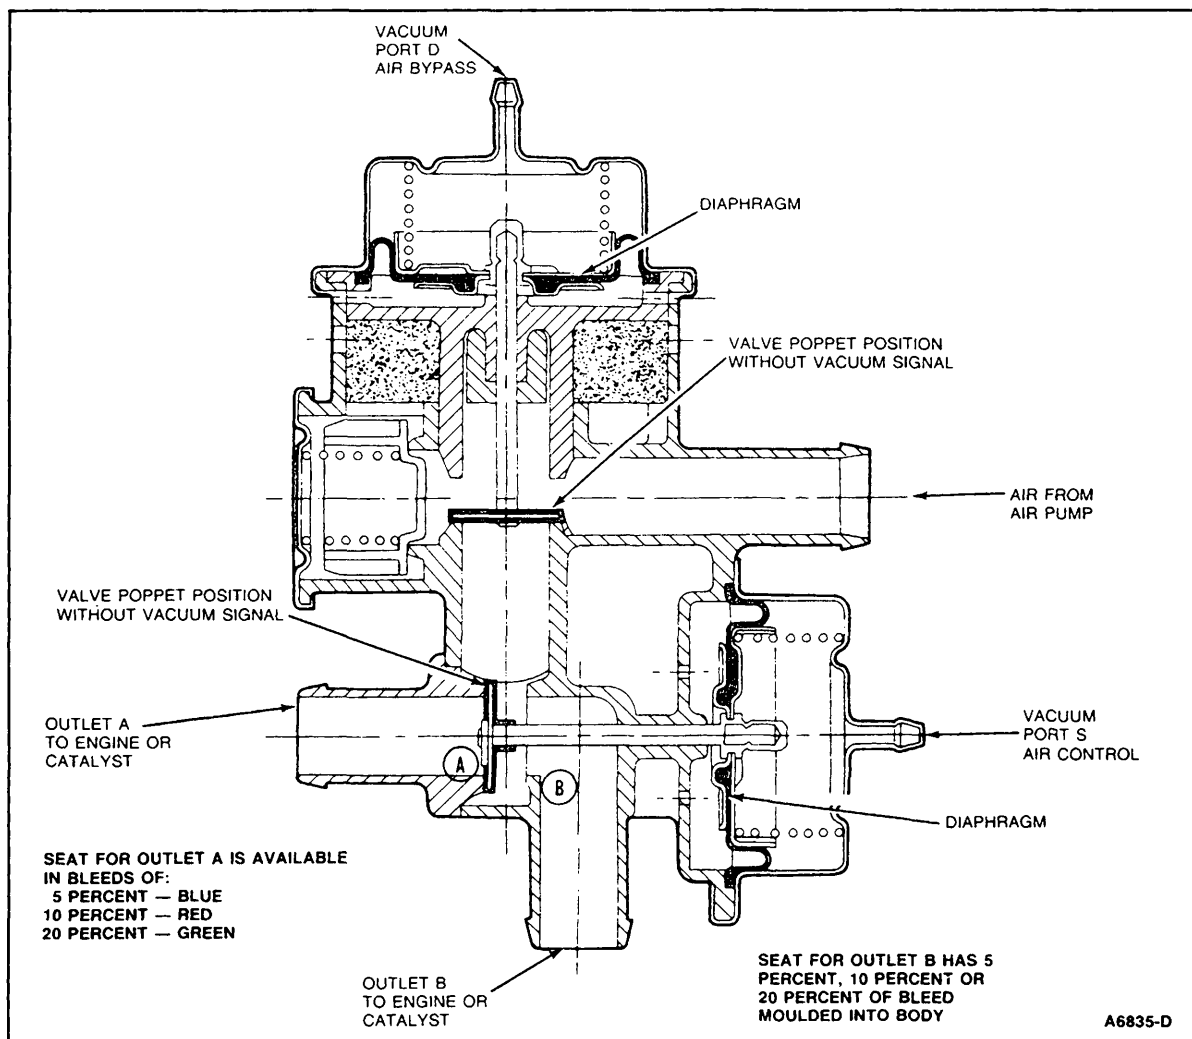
Valve Assembly Exhaust Air Supply Control (Normally Closed) With Bleed
